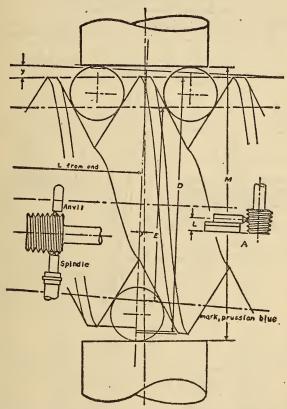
Measurement of pitch diameter of taper thread gages by the three-wire method
